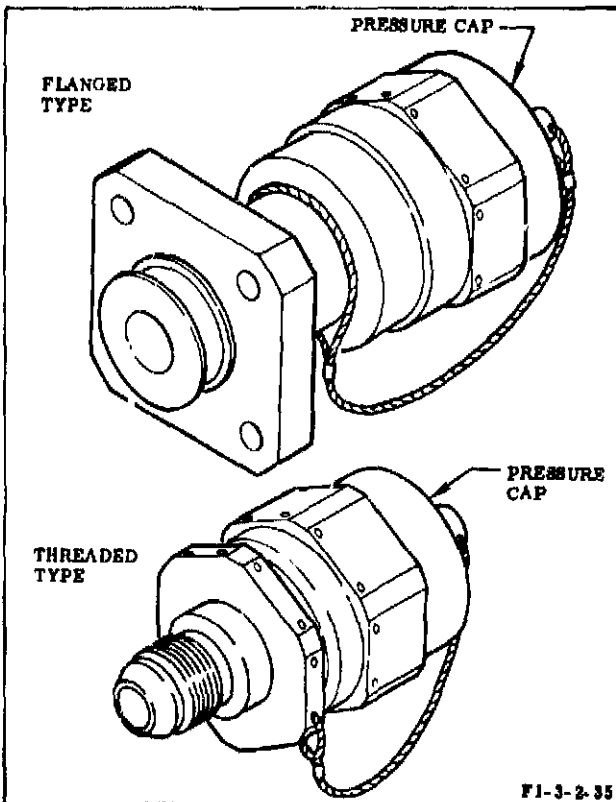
Quick-Disconnects (Typical)-- Exterior View
